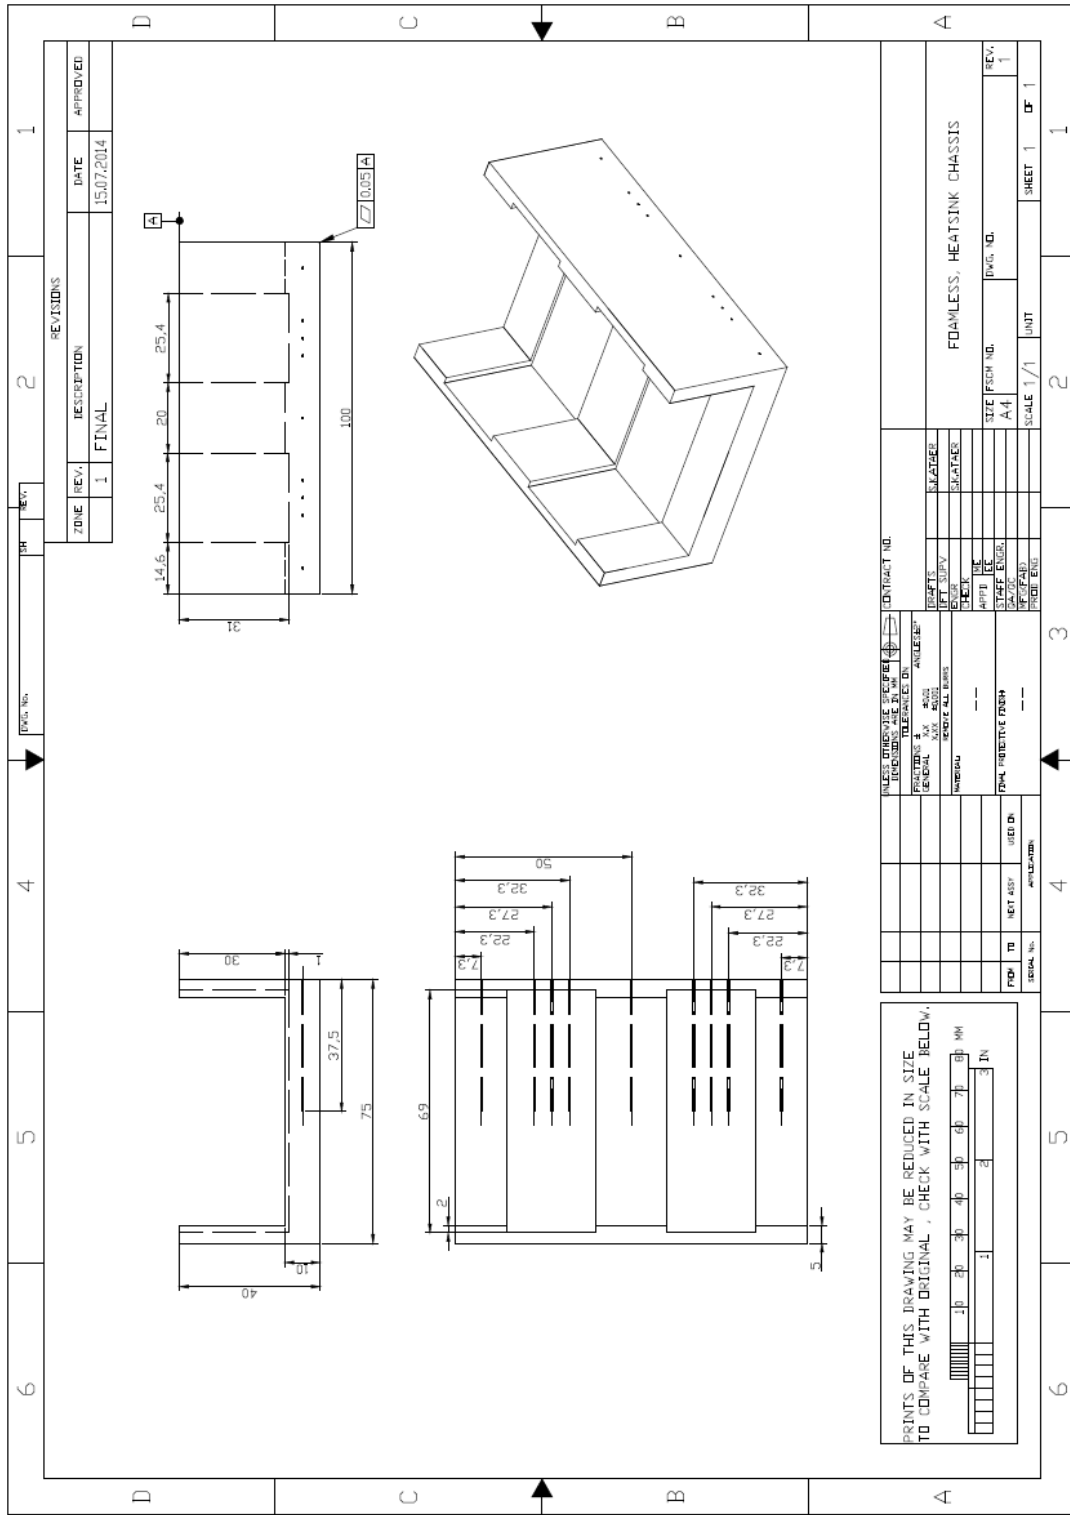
Technical drawing of bare chassis of foam embedded heat sink
